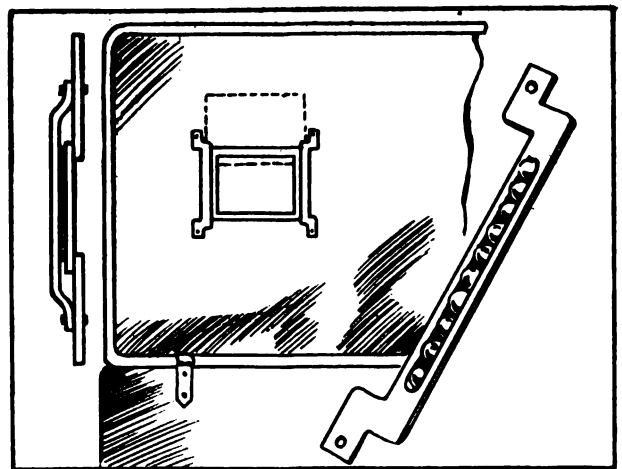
Novel Windshield Ventilator Utilizing Form of Ball Bearings.
